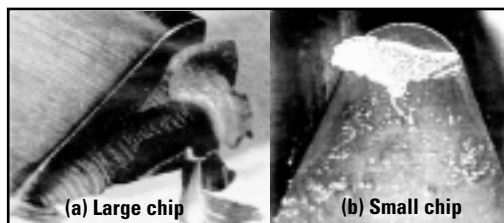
Chips observed on rake surface of hob tooth after emergency retract stop. This is supposed to express the status during cutting.
